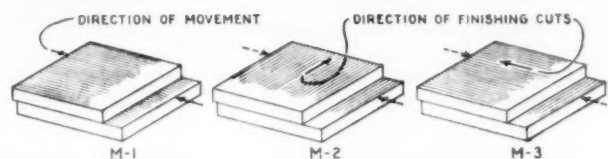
RELATION OF DIRECTION OF MOVEMENT TO DIRECTIONS OF FINISHING CUTS FOR BEARING PLATES TESTED.
